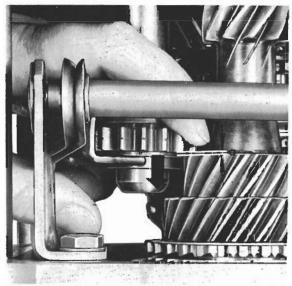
Clearance between reverse sliding gear and 2nd gear on the mainshaft. Dimension a must be 0.50 to 1.00 mm (.020 to .039 in.).
